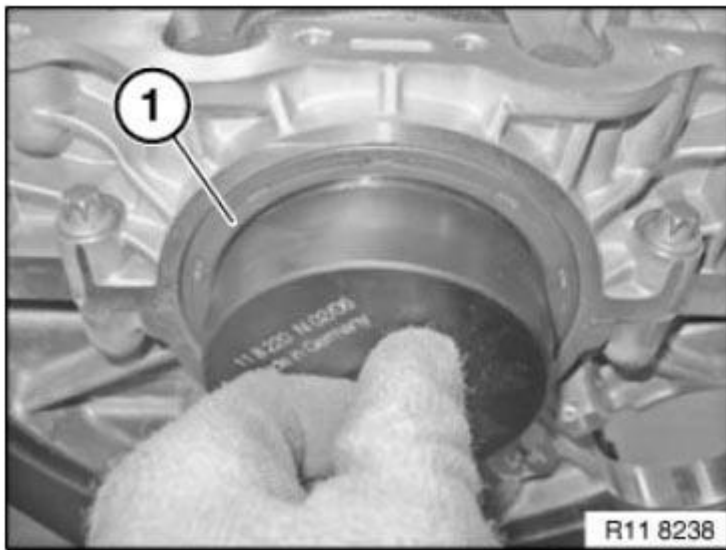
Moving Radial Shaft Seal Parallel Up Against Crankcase
